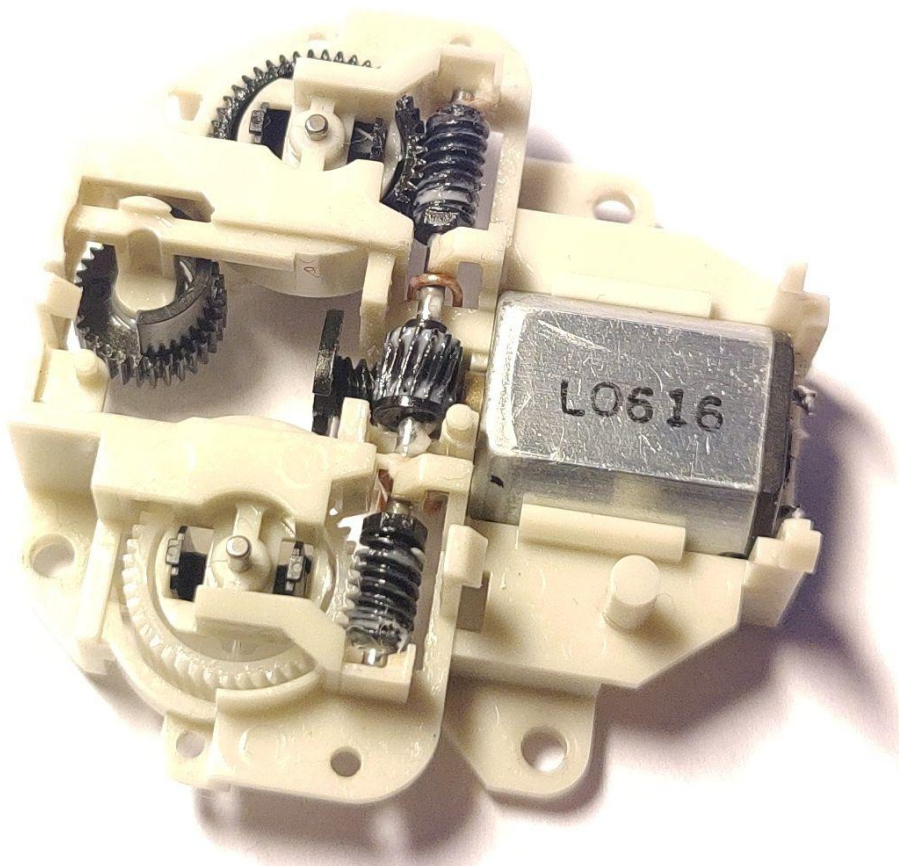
Alignment position of worm wheel propeller (vertical) and half circle cover ring (edge mid of photoelectric sensor) = Startup position of Dynamic Drum gearbox.
